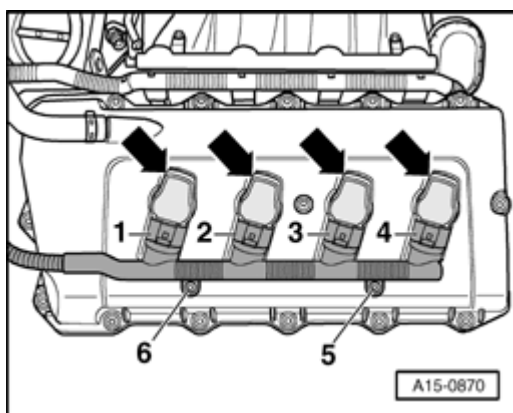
Removing Bolts On Right Cylinder Head, Disconnecting Electrical Harness Connectors &
